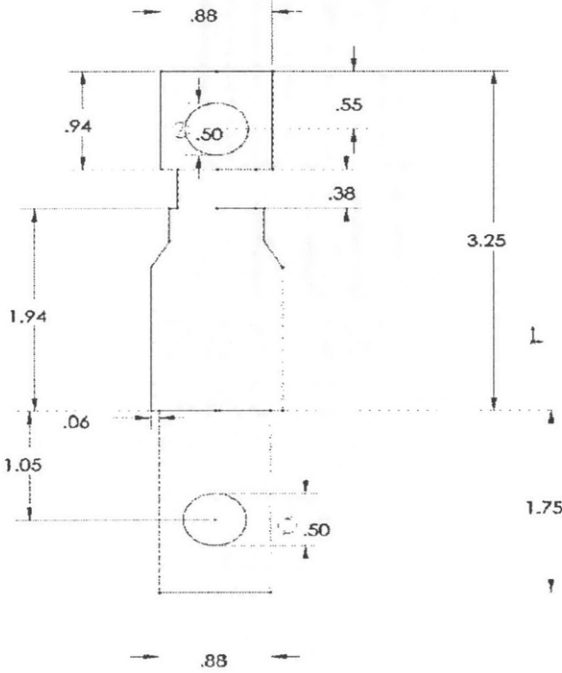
Schematic drawing of the tensile test specimen for the 1" EMW joint.
